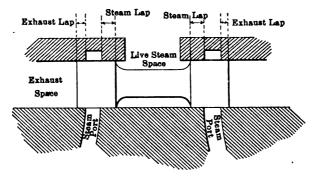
Piston Type of Slide Valve in Mid-position.
